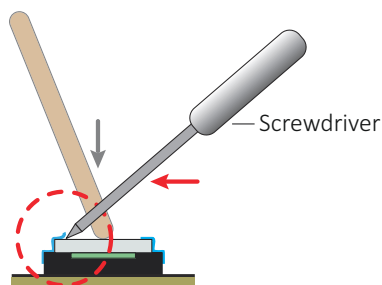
Screwdriver lifting up the adhesive tape (schematic view)
